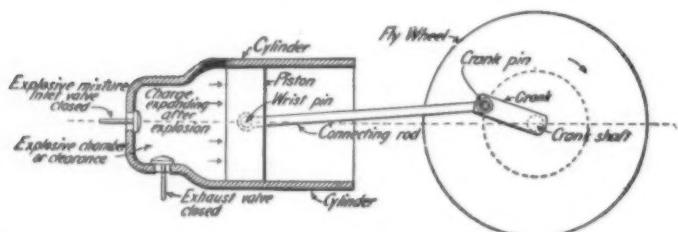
DIAGRAM SHOWING MECHANISM OF INTERNAL COMBUSTION ENGINE—EXPANSION STROKE.
